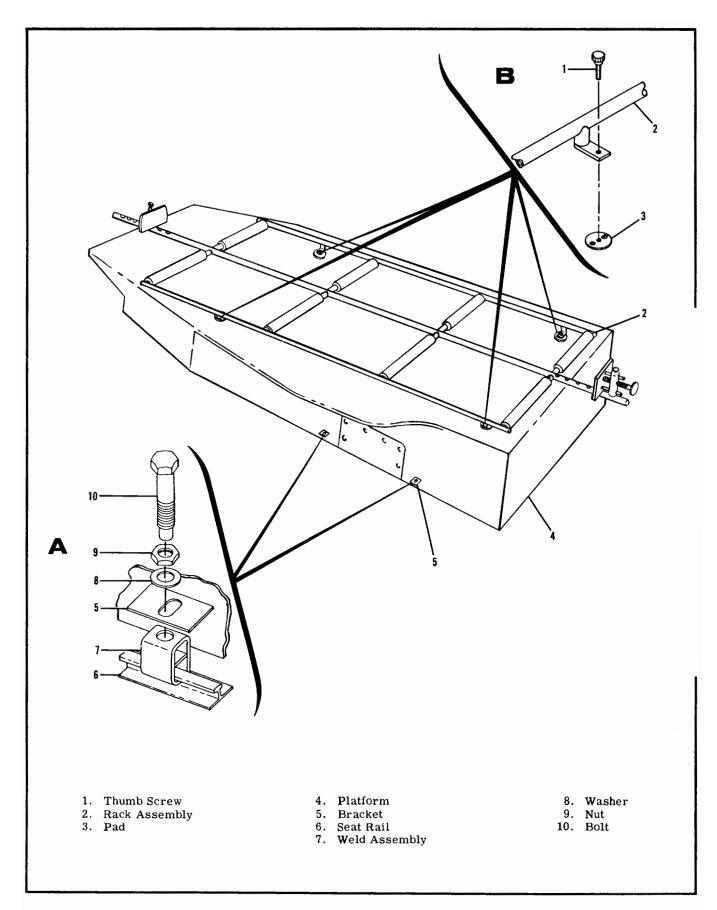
Casket Carrier Installation (Sheet 1 of 2)
